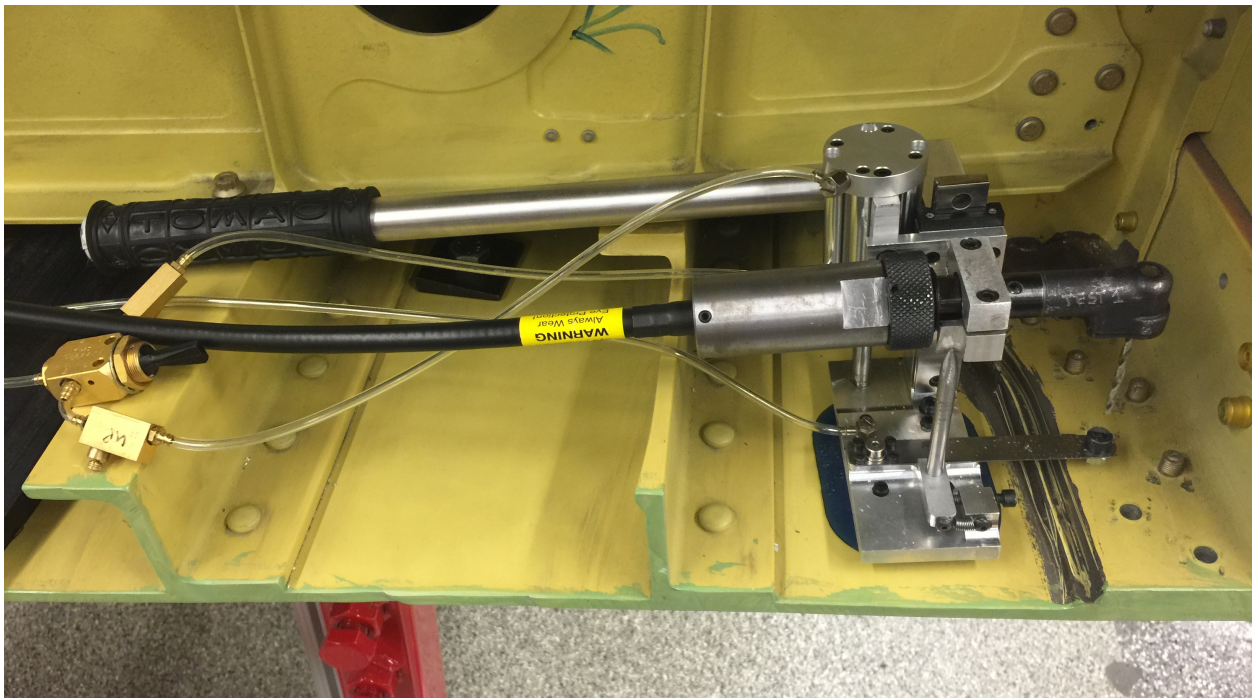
The manually operated pneumatic tool being placed in the cross-section of an actual airplane wing. Note that a wedge would be inserted between the handle and the last stringer it spans.
